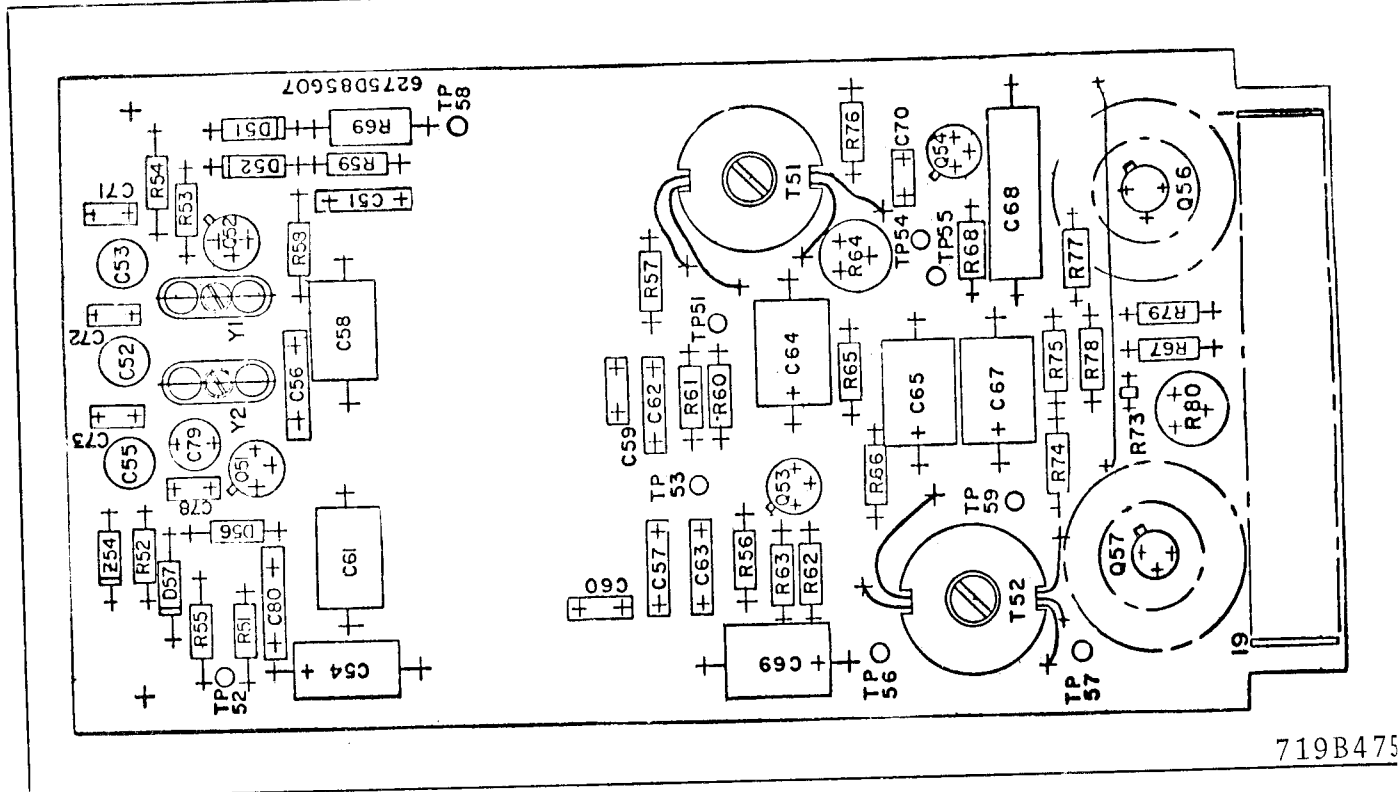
Component Locations of Transmitter Printed Circuit Board.
